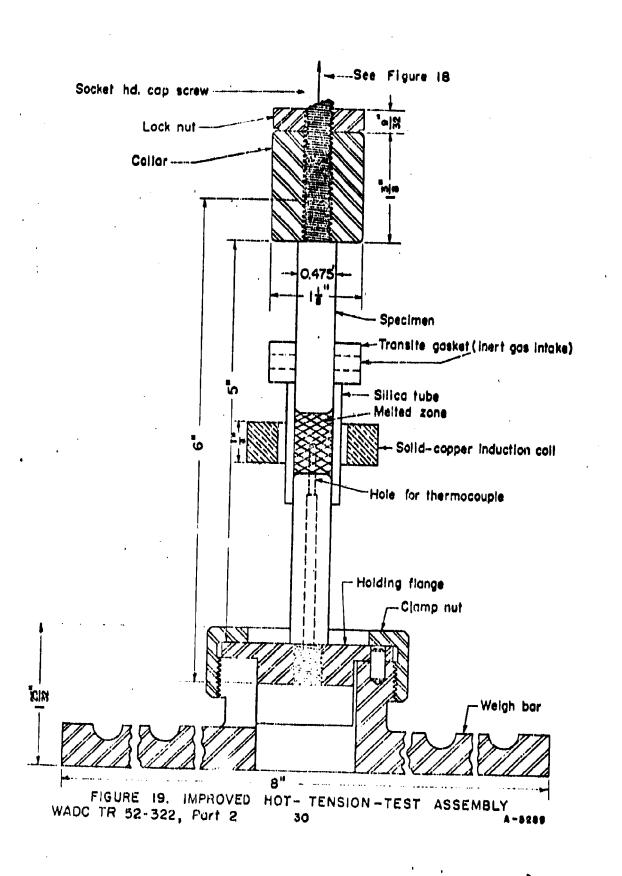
IMPROVED HOT-TENSION-TEST ASSEMBLY WADC TR 52-322, Part 2 28
